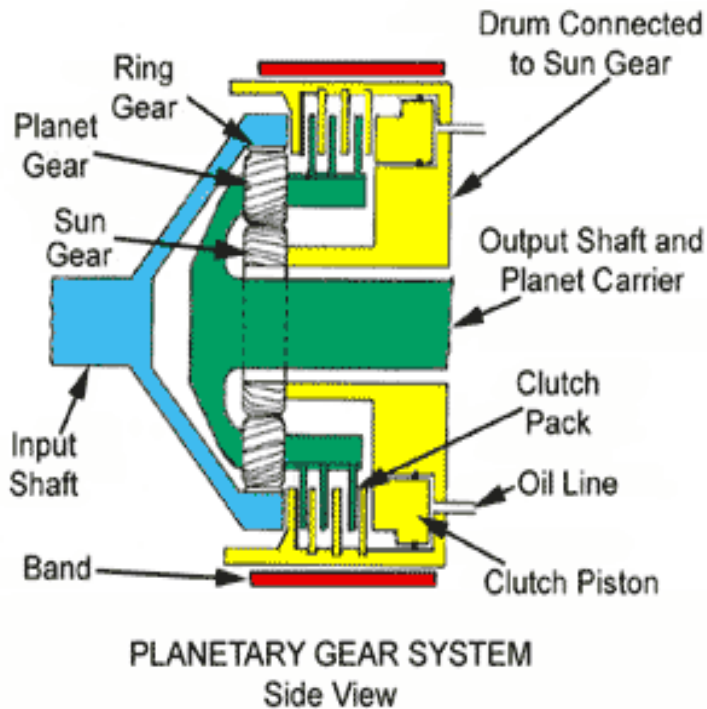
Main elements of a automatic gearbox with planetary gearset
